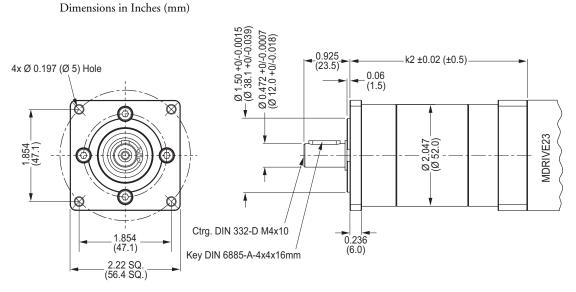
Planetary Gearbox Specifications for MDrive23Plus with NEMA Flange
